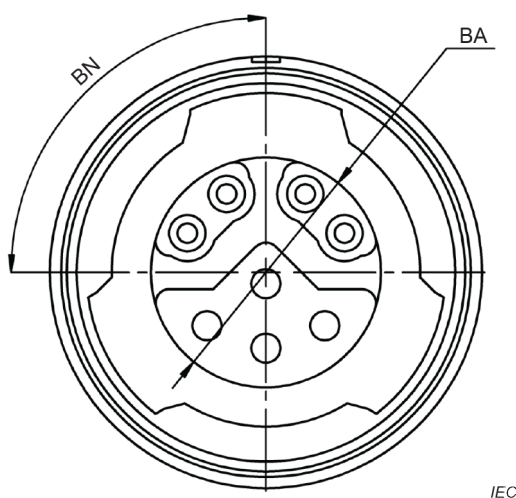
Front view of the female side of the push-pull housing for Type 4
